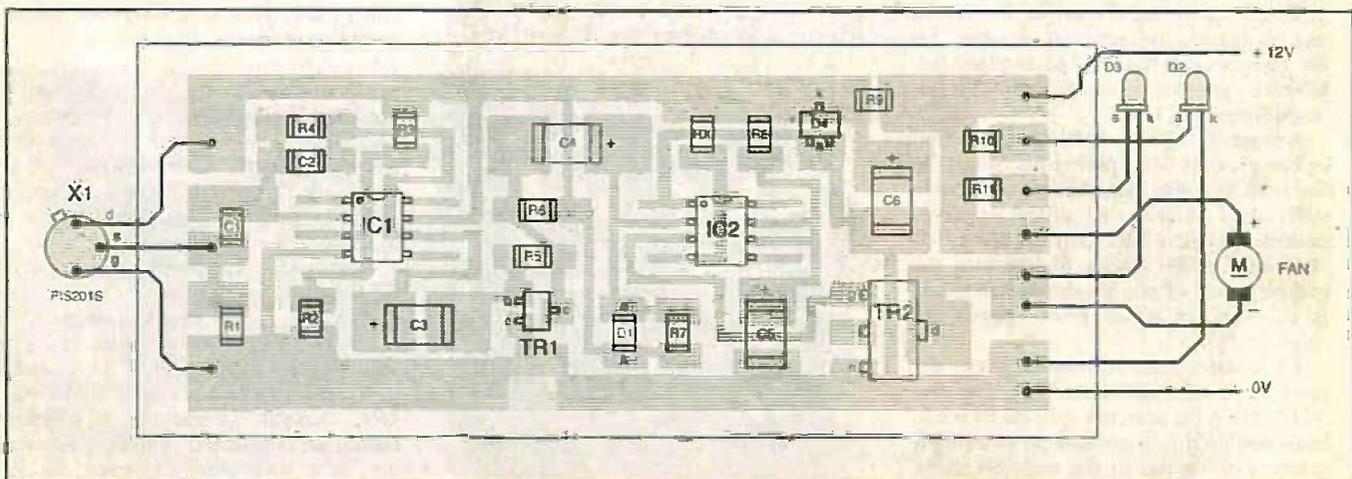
Component layout on the Smoke Absorber surface mount p.c.b. (twice life-size).
